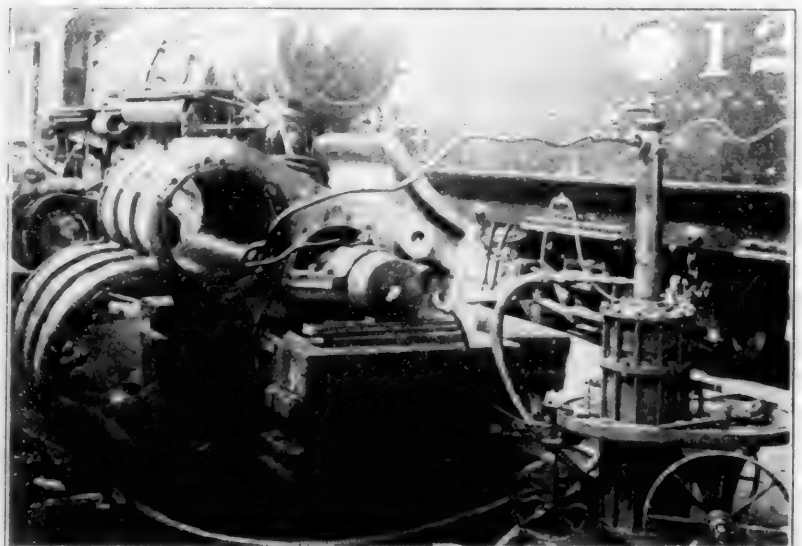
HYDRO-PNEUMATIC PISTON VALVE BUSHING EXTRACTOR.
